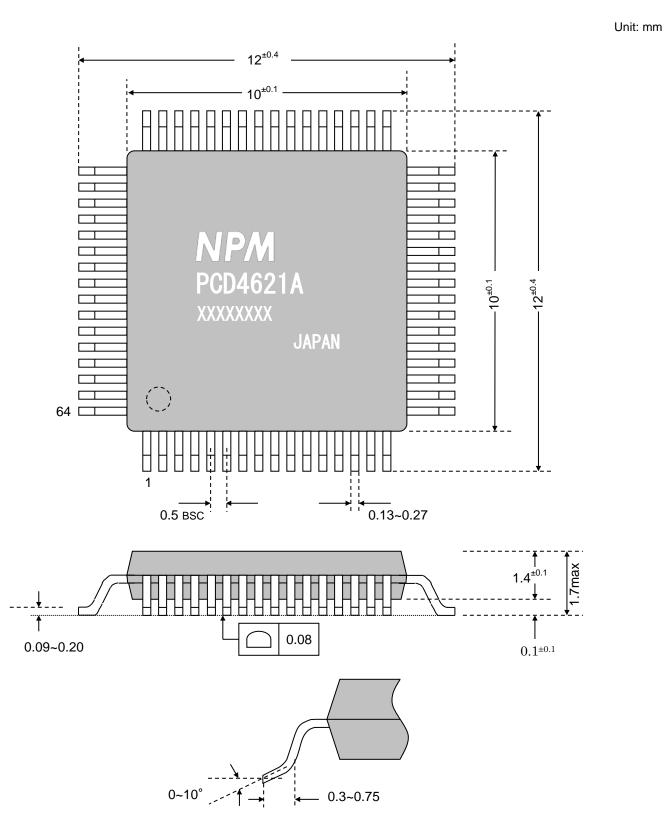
PCD4621A external dimensions (64-pin QFP)
